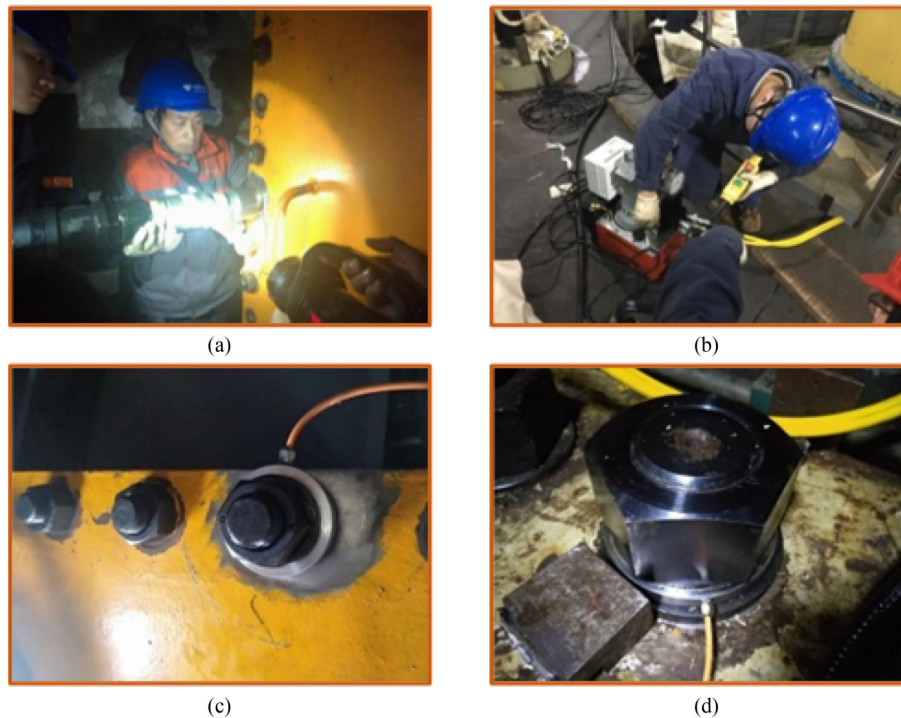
Construction process of sensors and bolts: (a) pre-tightening of M30 bolts; (b) pre-tightening of M100 bolts; (c) installed M30 bolts with sensors; (d) installed M100 bolts with sensors.
